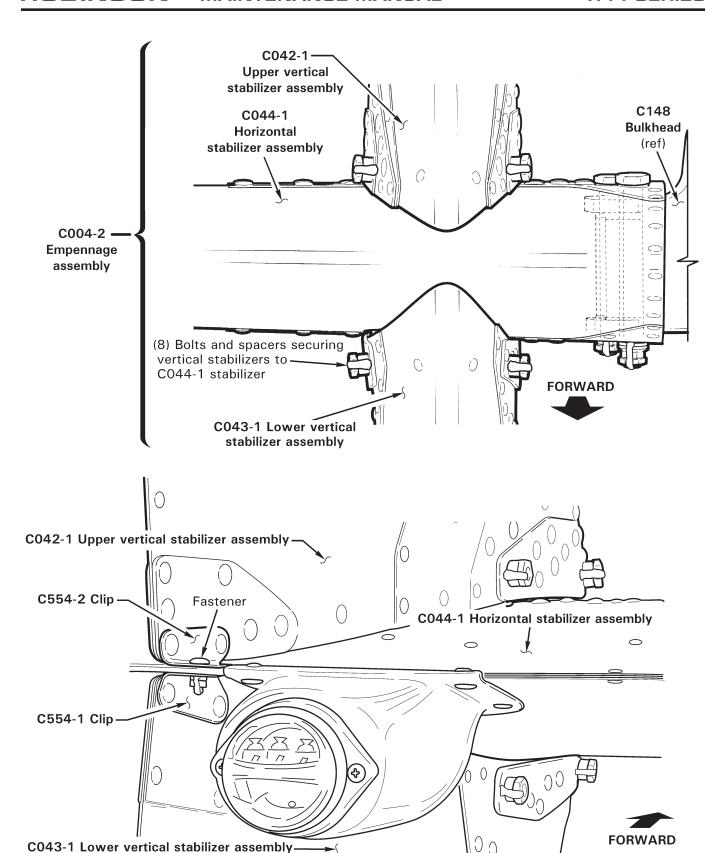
A C004-2 EMPENNAGE ASSEMBLY
